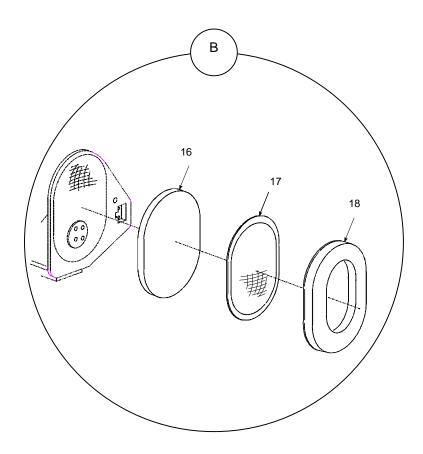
Headset Electrical Assembly H-365/VRC (Sheet 2 of 2)
